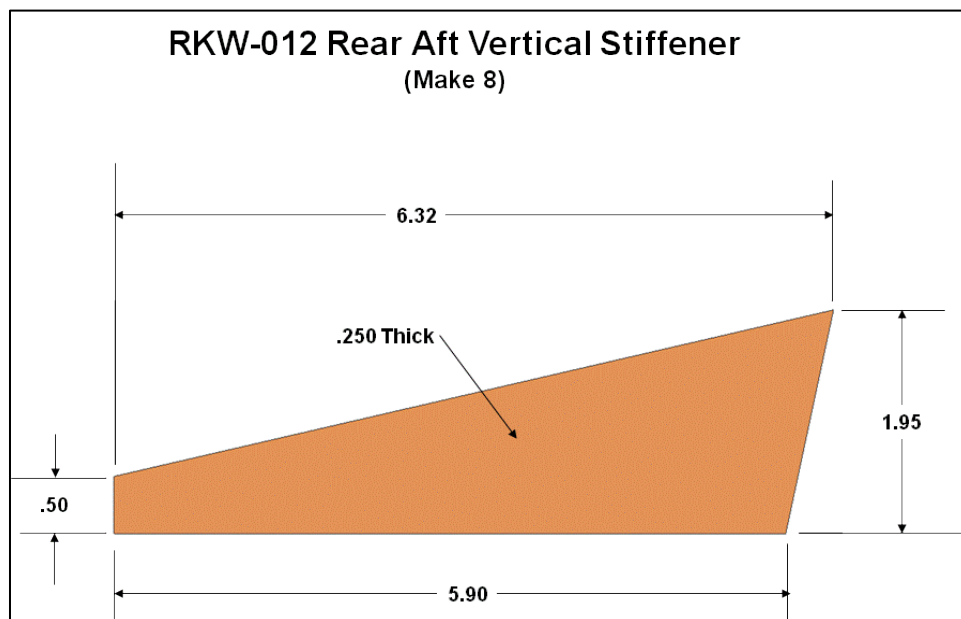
Fixture rear aft vertical stiffener – drawing
